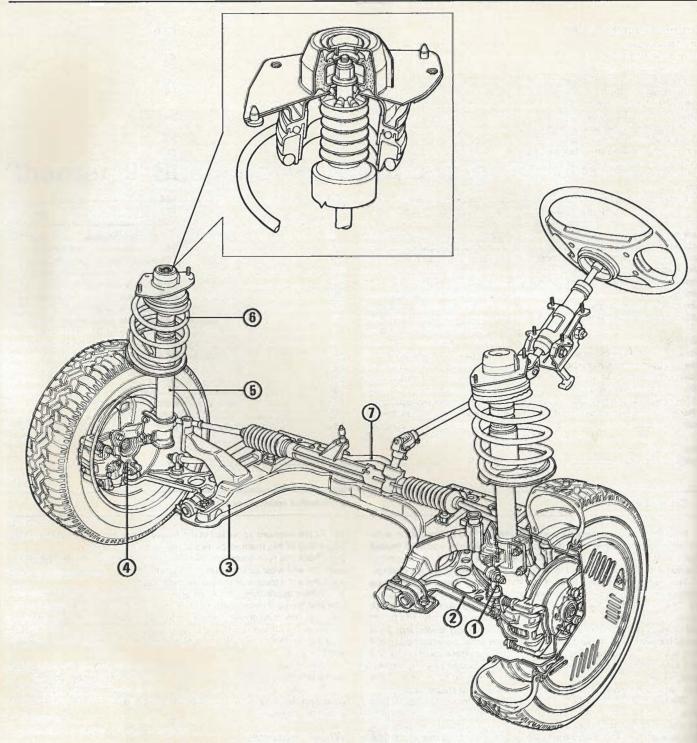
Front suspension and steering assembly - left-hand drive model shown (Sec 1)
